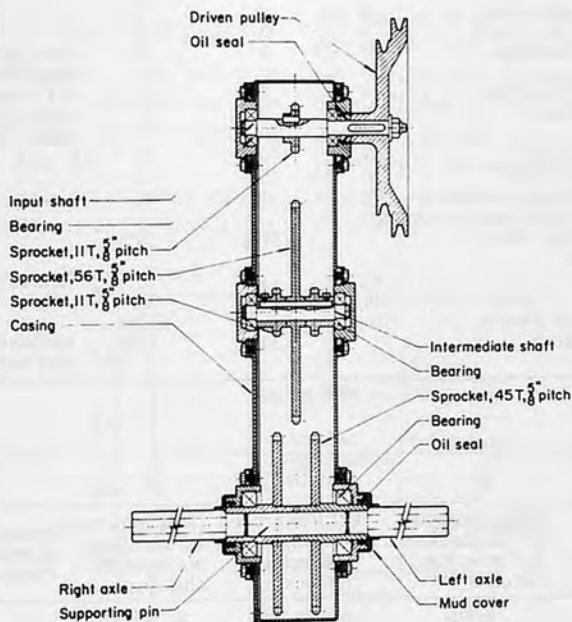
Cross-sectional view of IRRI 6-8 hp Power Tiller without steering clutches.
